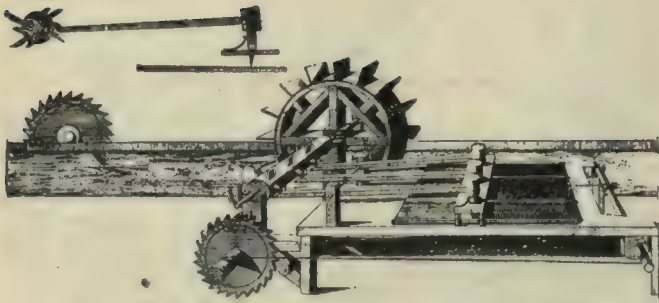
WATER-POWER FILE-CUTTING MACHINE
